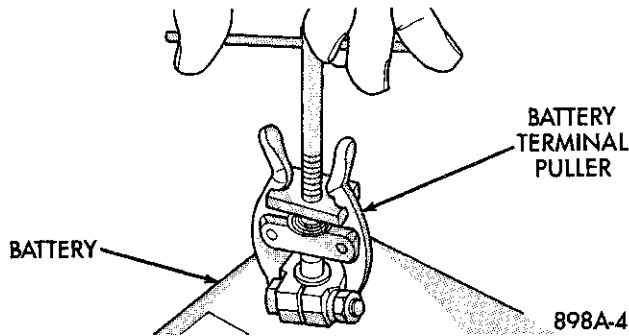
Remove Battery Cable Terminal Clamp - Typical
